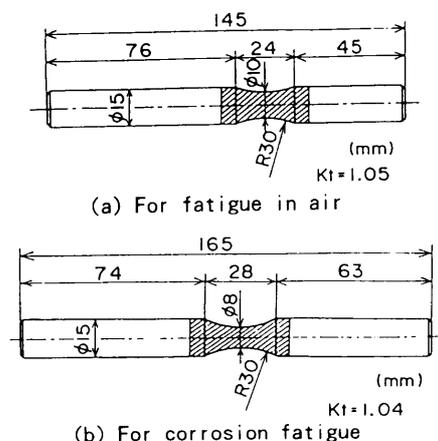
Shape and dimensions of fatigue test specimens; (a) for fatigue tests in air, and (b) for corrosion fatigue tests in saline solution
